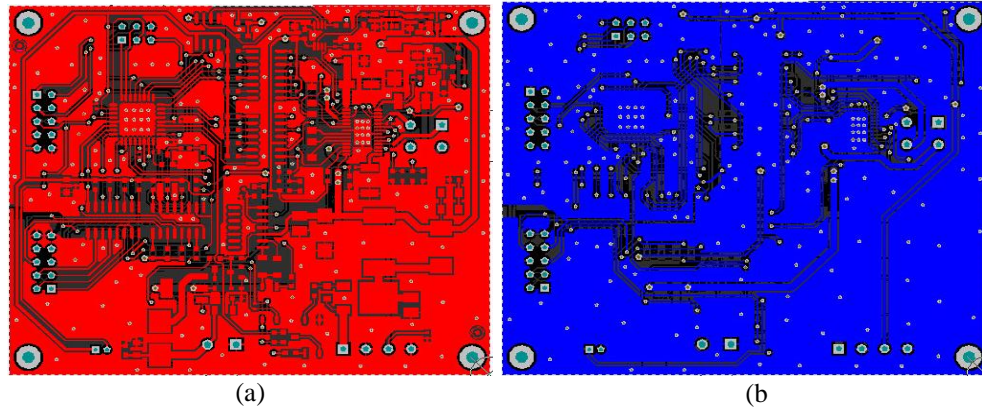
PCB layout of angular direction controlling unit. (a). Top layer (b). Bottom layer
